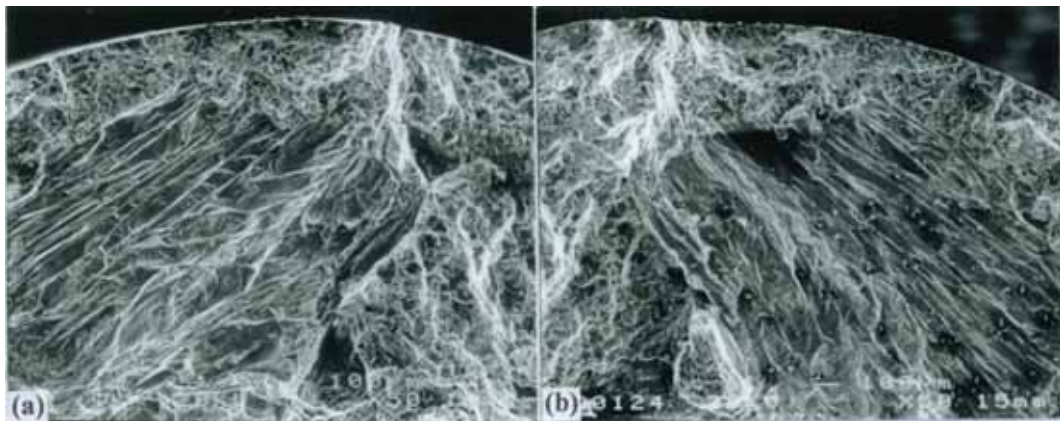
The SEM images showing the double oxide film defect on fracture surfaces of the cast aluminium alloy. [Cao and Campbell 2001]
